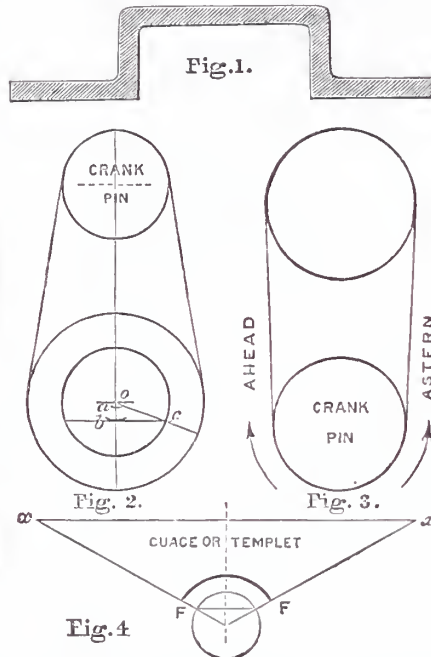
Section of D Slide. Fig. 2.—Plumbing Centre of Crank Pin over Centre of Crank Shaft, Centre Line of Eccentric. Fig. 3.—Plumbing Crank Pin for Marine Engine; Shaft to be Plumb, Pin down. Fig. 4.—Gauge or Templet; when tried upon Shaft for Marking Centre Lines, *xx* to be levelled by Spirit-Level.
